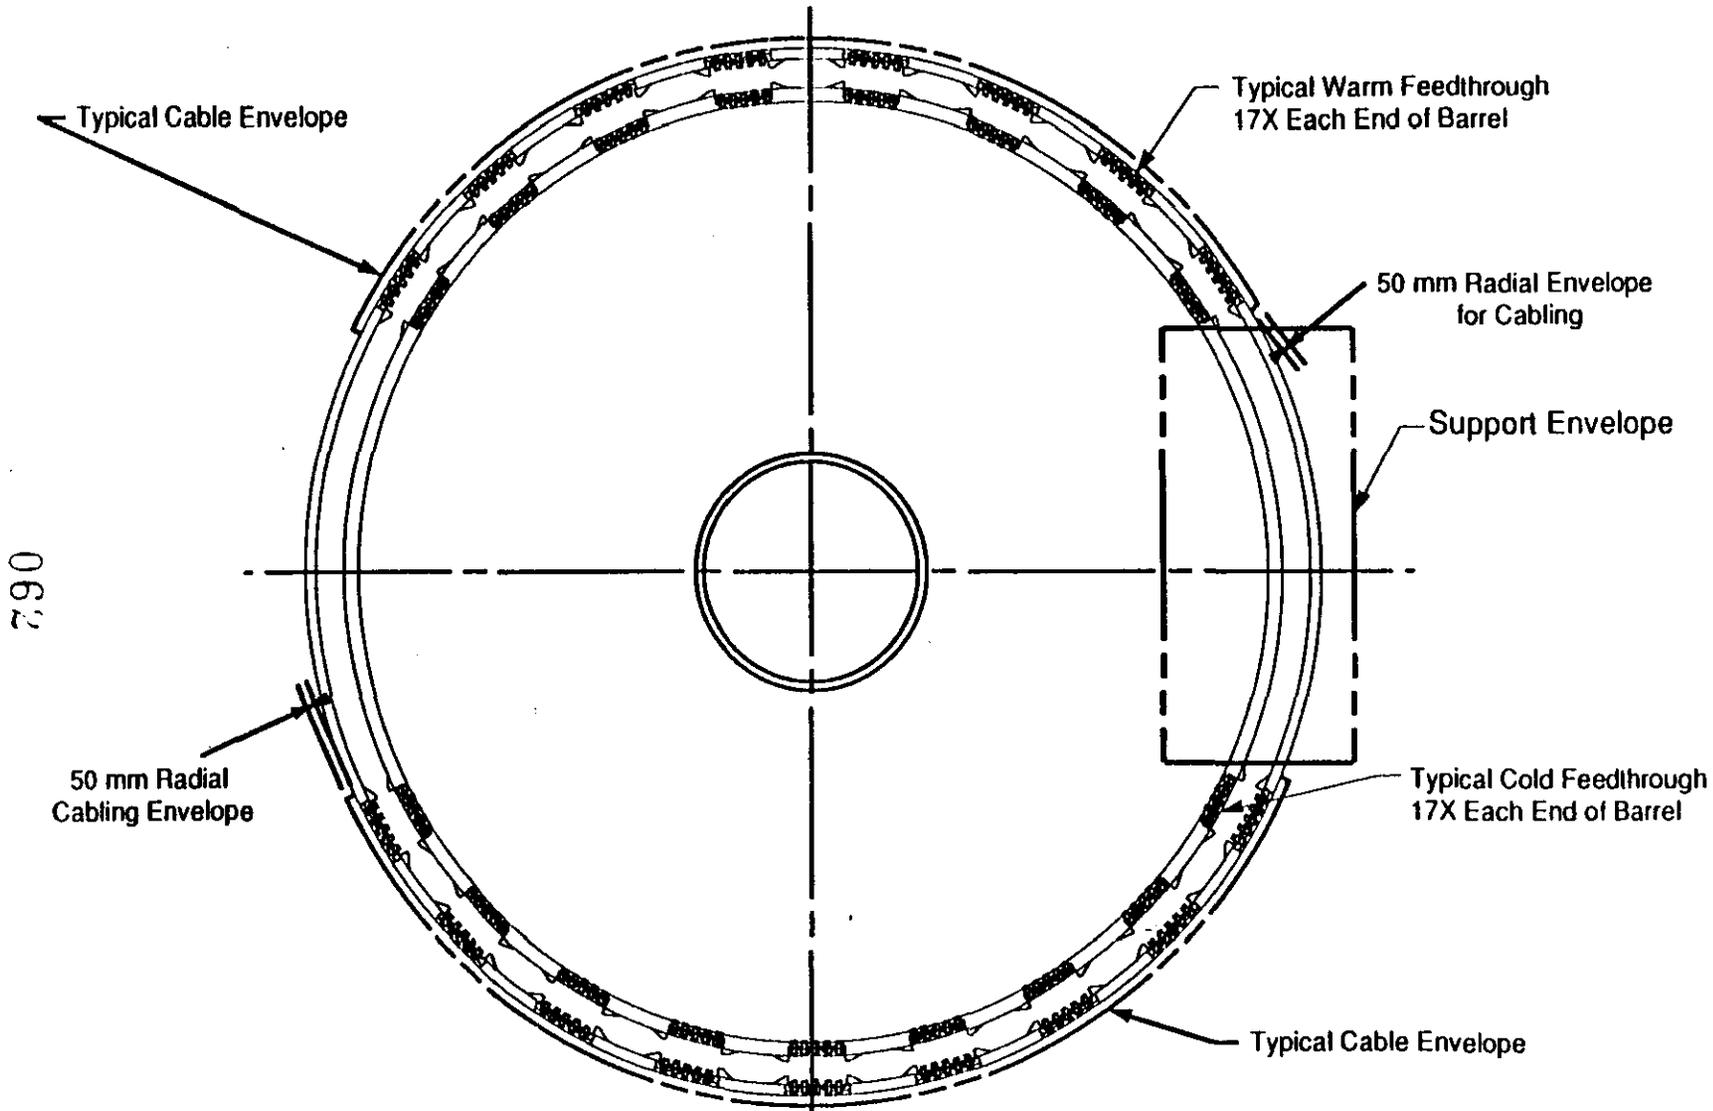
End Section View Showing Feedthrough Orientation and Cable Routing Space to Support Pedestal
